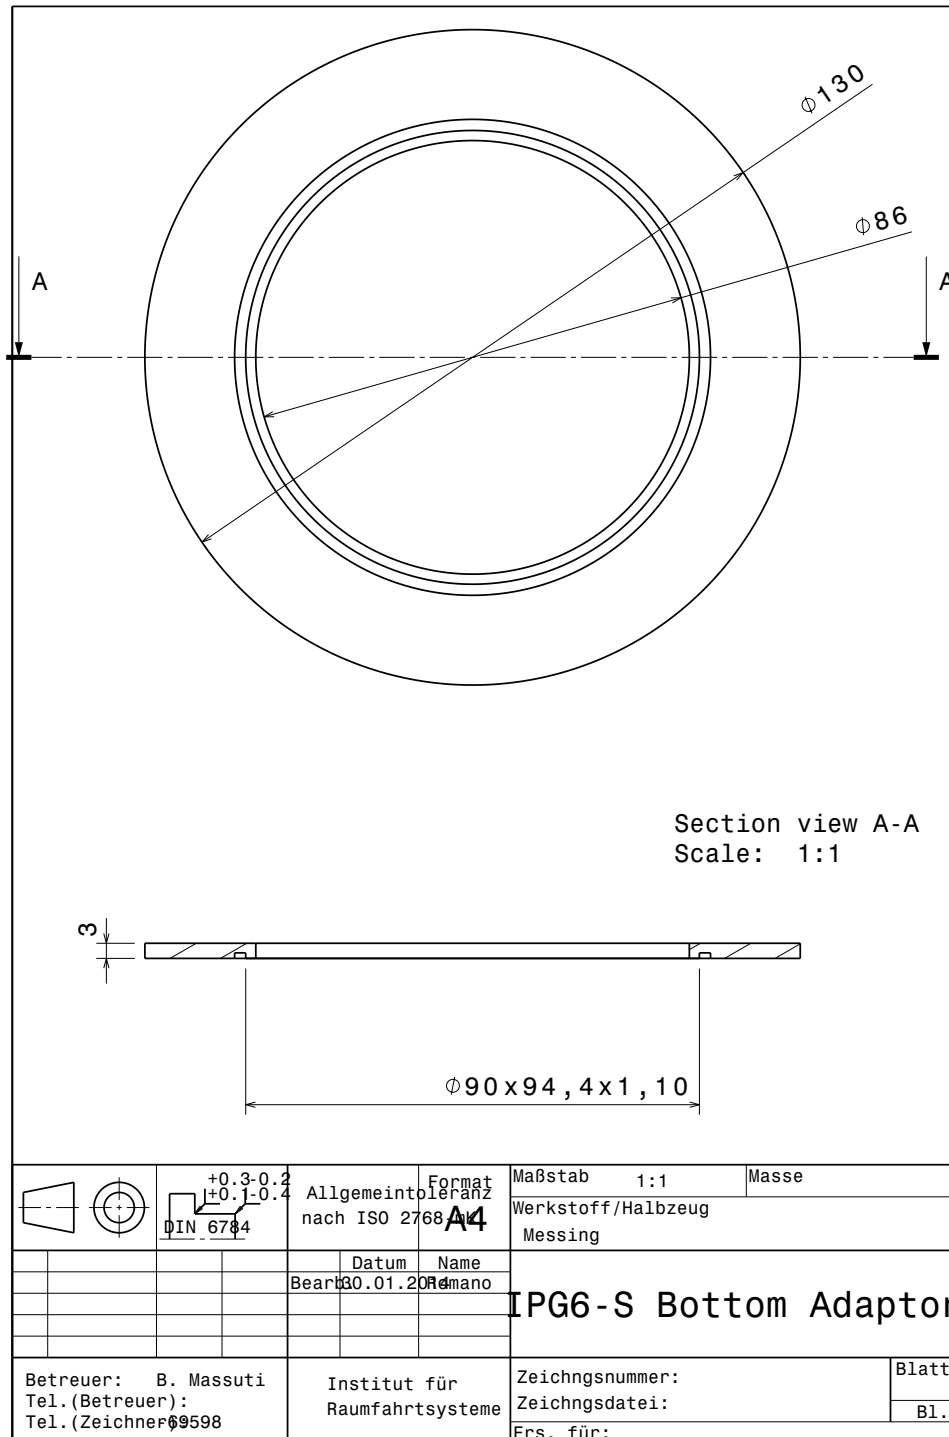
Adapter for the connection of the bottom flange to the vacuum chamber.
